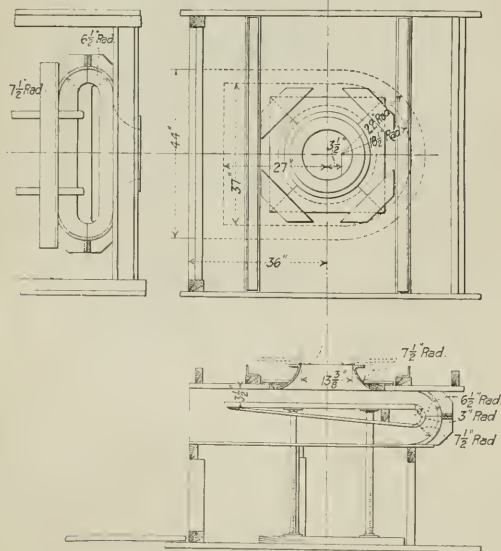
DIMENSIONS OF MODEL OF HYDRAUCONE REGAINER USED IN A NUMBER OF POWER PLANTS
